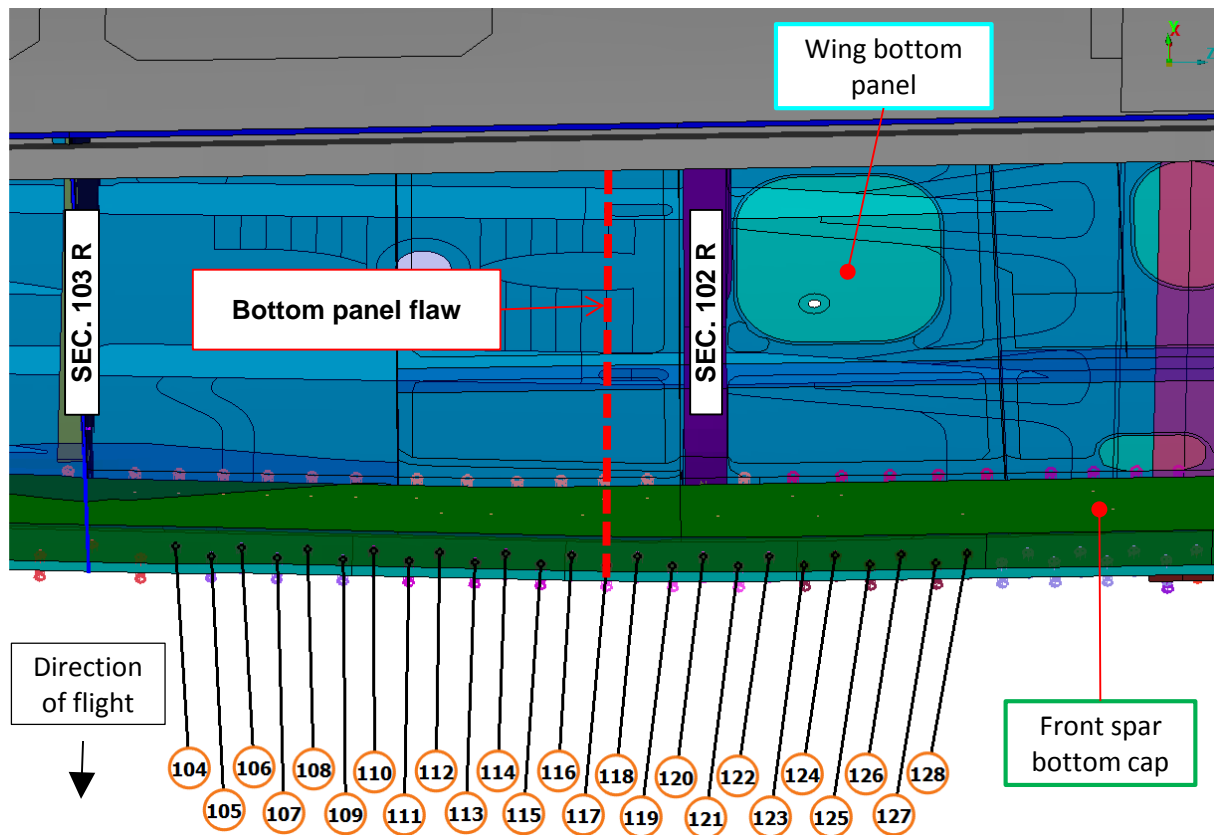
Rivet numbering system of the front spar bottom cap – bottom panel joint.
